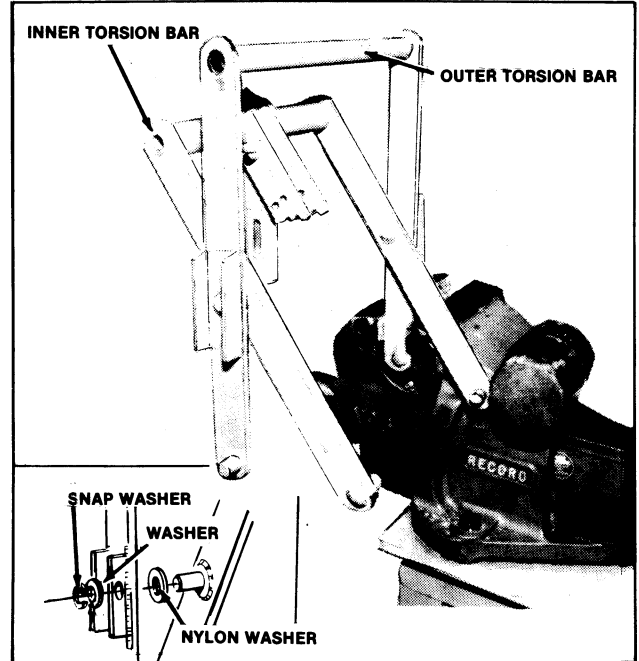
Removal of Torsion Bars from Bottom Plate
